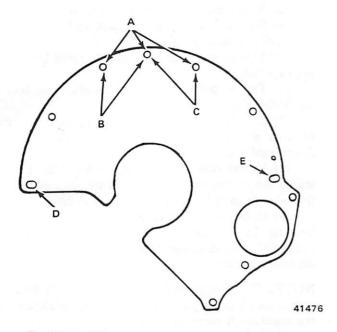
A-13 Shim Placement (Six-Cylinder Engine Shown)
